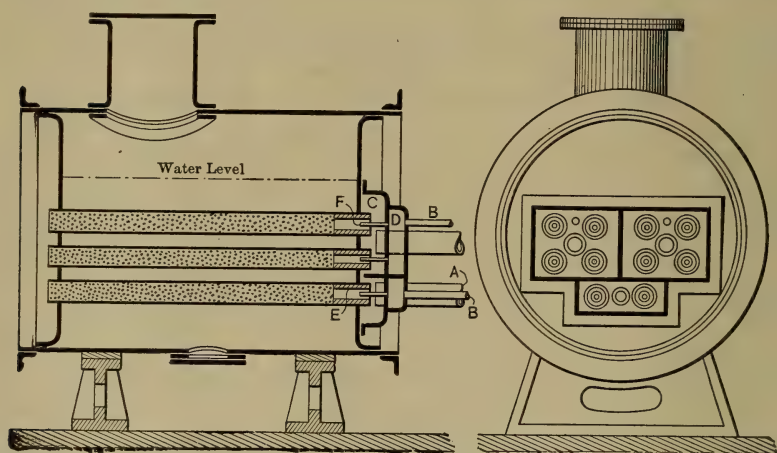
Experimental Boiler Involving the Principles of "Surface Combustion."
